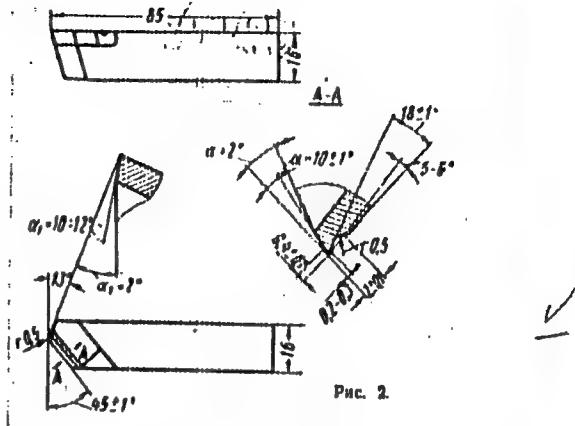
Geometrical parameters of straight cutters for machining 1Kh18N9T steel.
